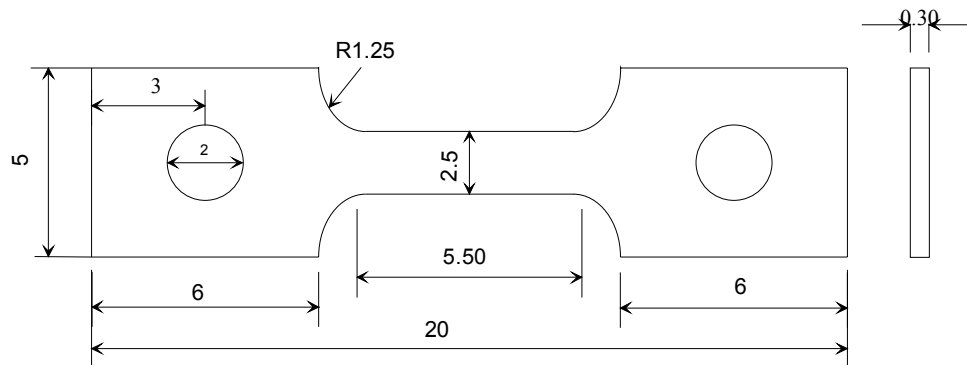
The PIREX tensile specimen geometry (dimensions are expressed in mm).
